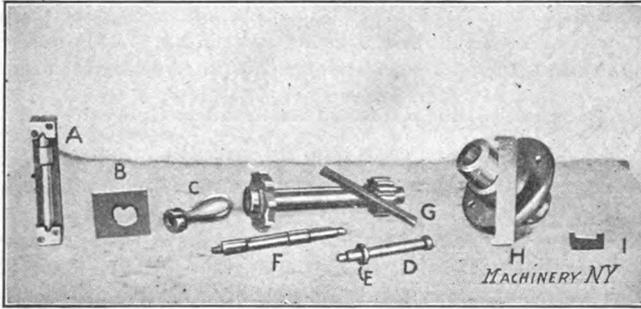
Gages for Testing the Parts of the Device shown in Fig. 13
